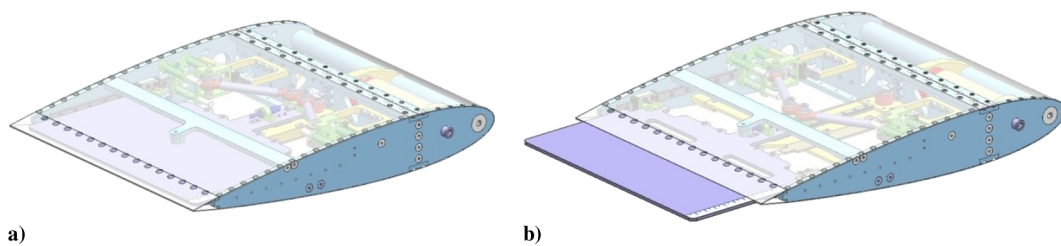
CAD drawing of prototype in a) retracted, and b) deployed state (isometric view, translucent skin).
